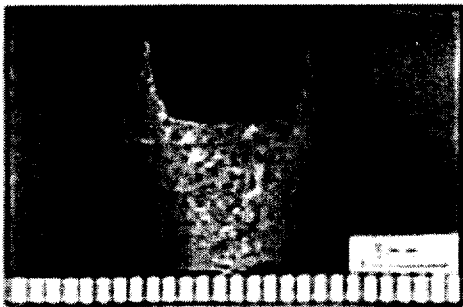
Plasma keyhole welding of I-groove butt joint(6.0mm thickness)
